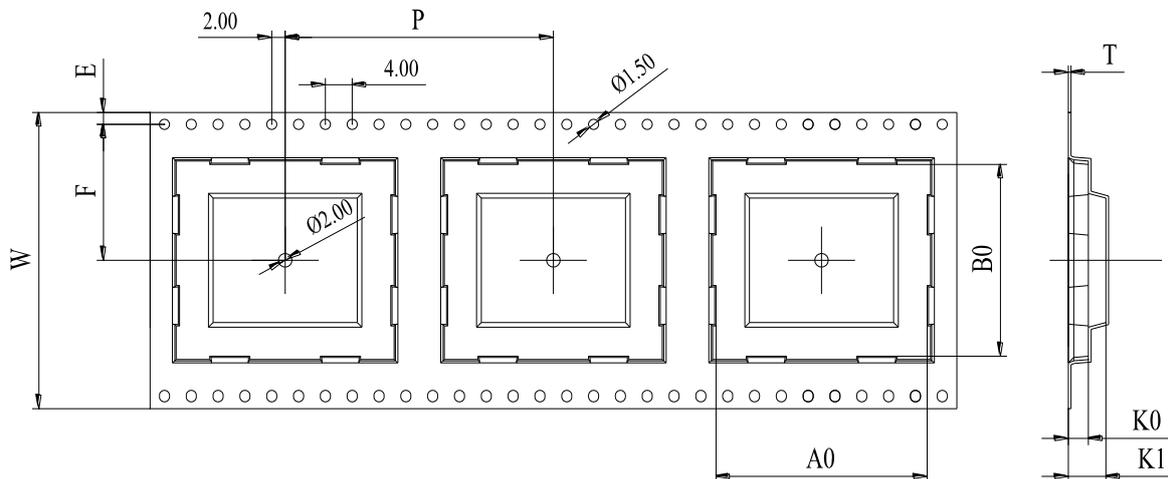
Carrier Tape Dimension Drawing (Unit: mm)
